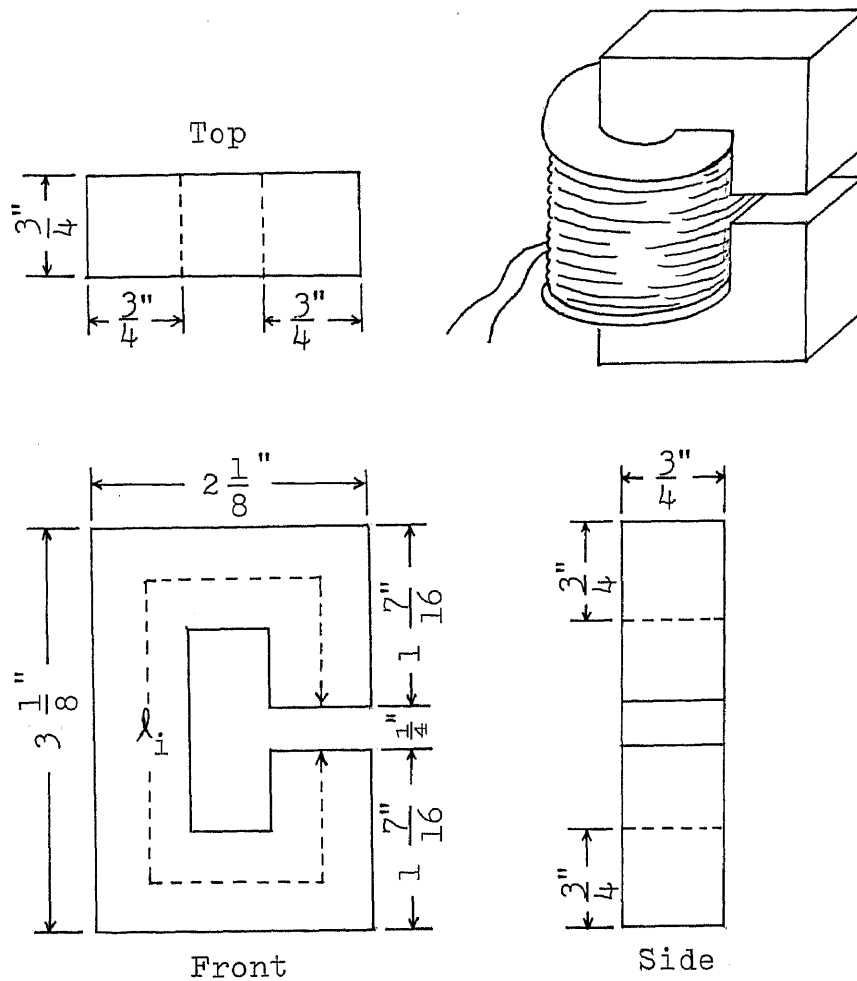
Magnetic structure and dimensions of the iron core.
